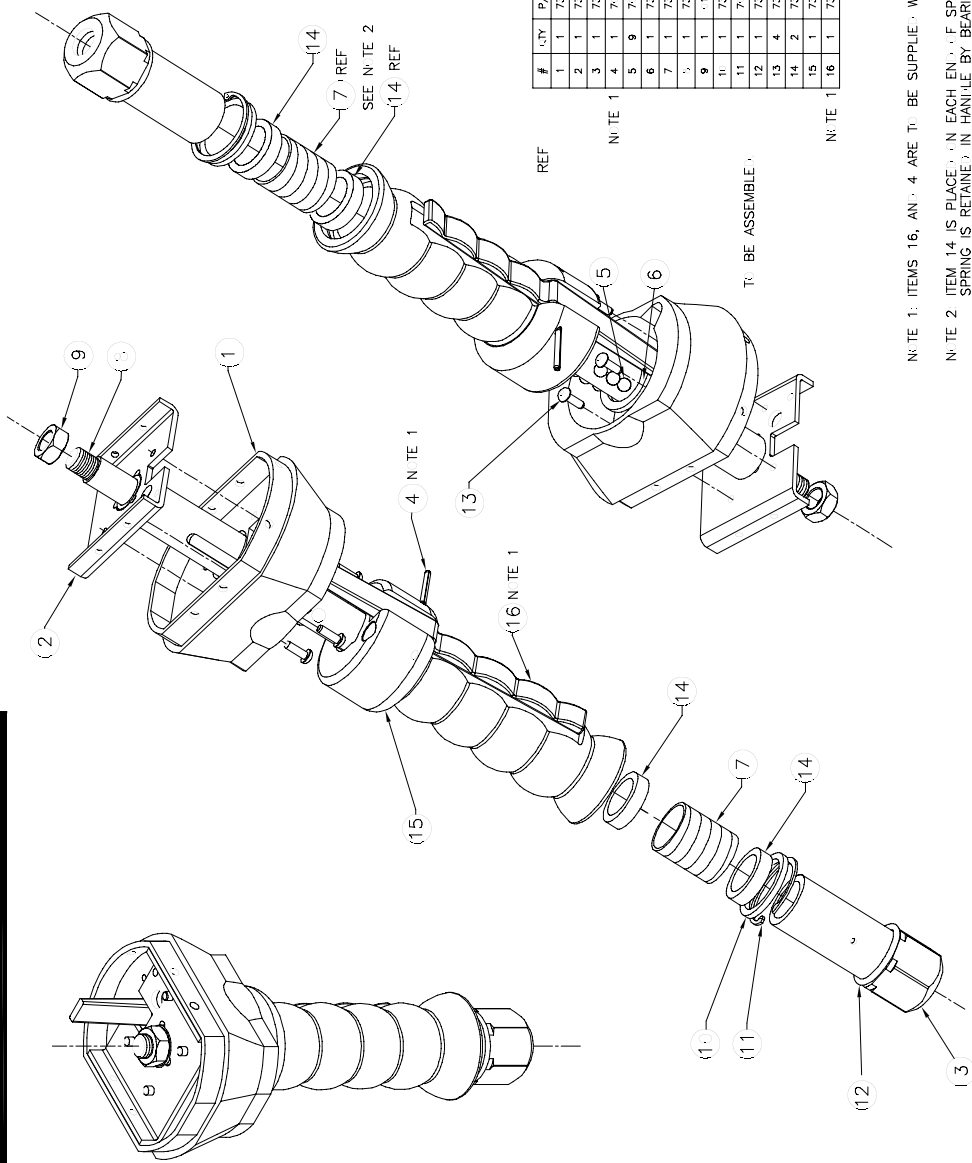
(bottom) & Figure C2 (top). Standard Handle Assembly.
